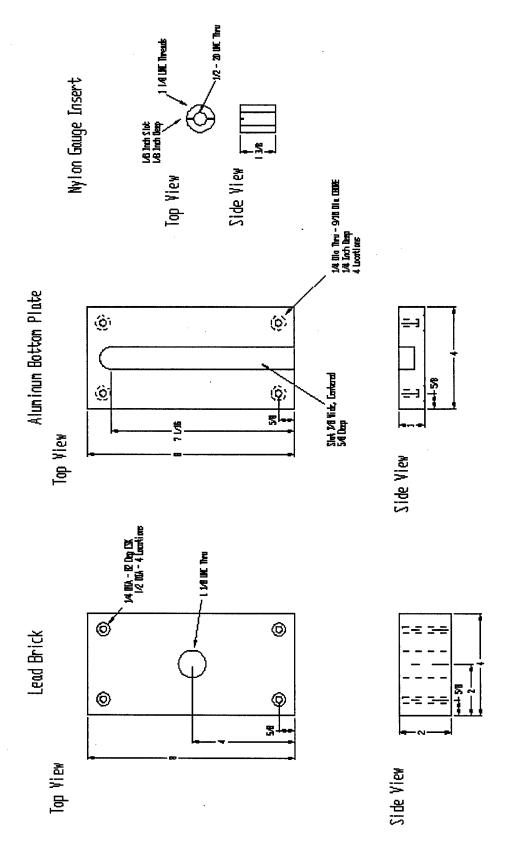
Engineering drawing of lead "pig" pressure transducer mount.
